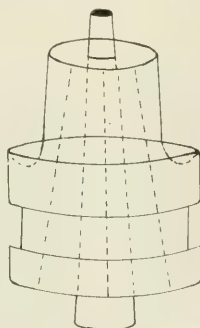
EXPANDING AND BEADING TOOL—ERIE
